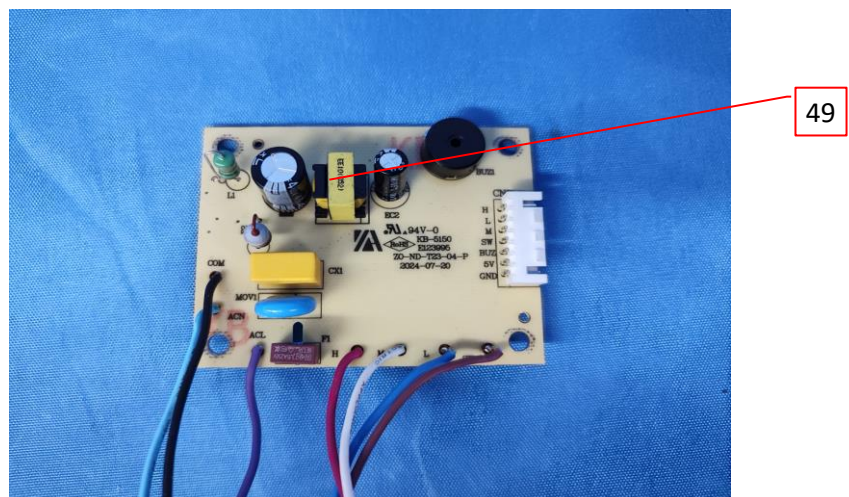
Power PCB view for NDTFT23R and NDTFT23RH
